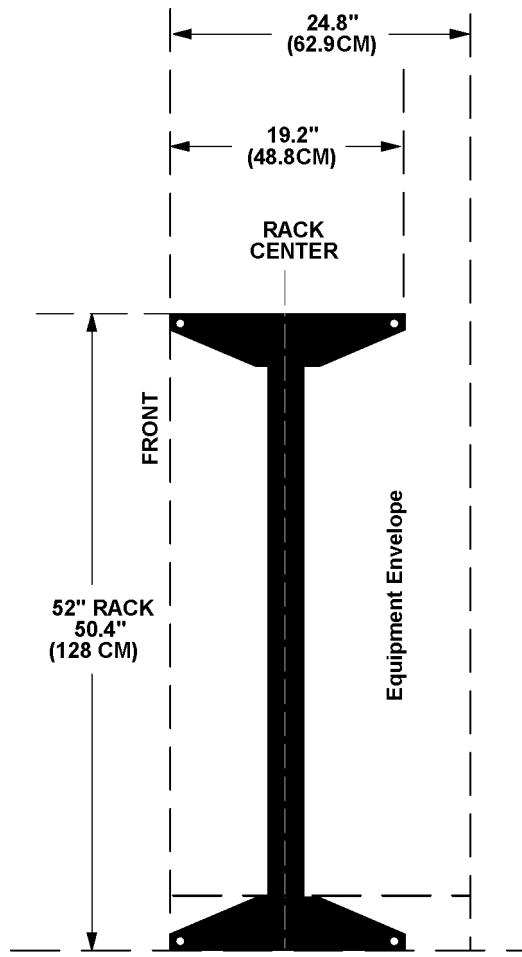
GTR 8000 Site Subsystem - Floor Mounting Detail on page 68](#) is the footprint diagram for the GTR 8000 Site Subsystem.
